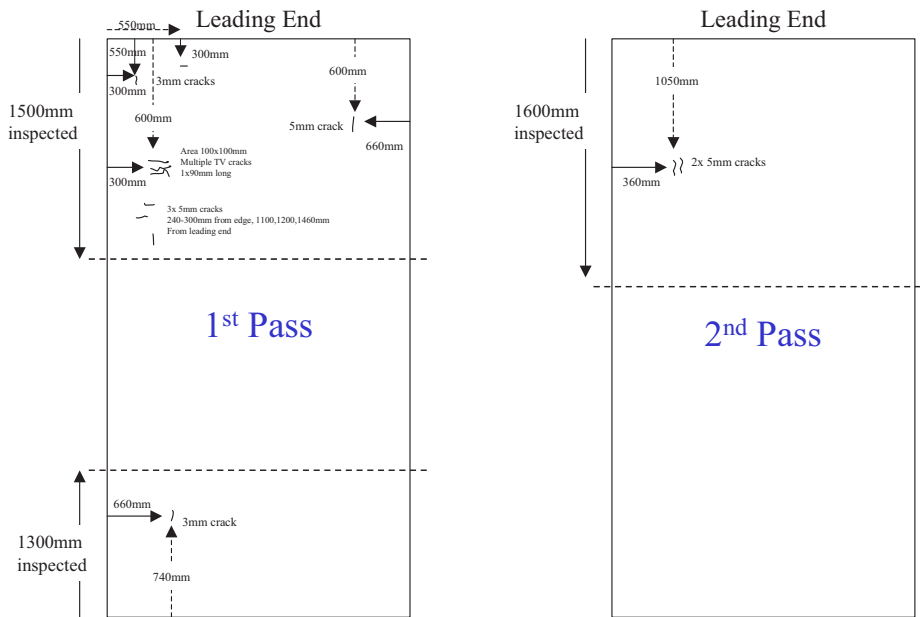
Magnetic particle inspection for cast 79532
